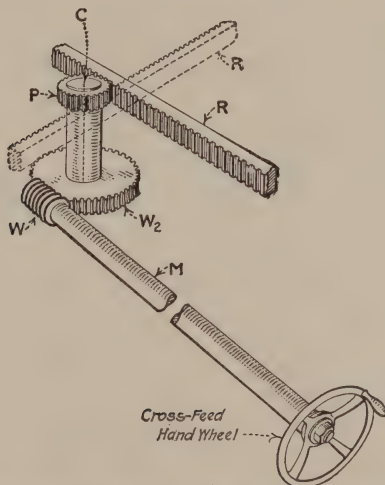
Sketch to illustrate the relative positions of the cross-feed hand-wheel, the shaft M , worm W , wormwheel, W_2 the pinion P , and the rack R which is fastened to the wheel-stand slide. Particular attention is called to the fact that the axis of the wormwheel and the pinion is in the pivot center of the wheel-stand slide, and consequently by turning the handwheel, the rack (and the wheel-stand slide) is moved (fed) no matter what its angular position on the bed may be.
